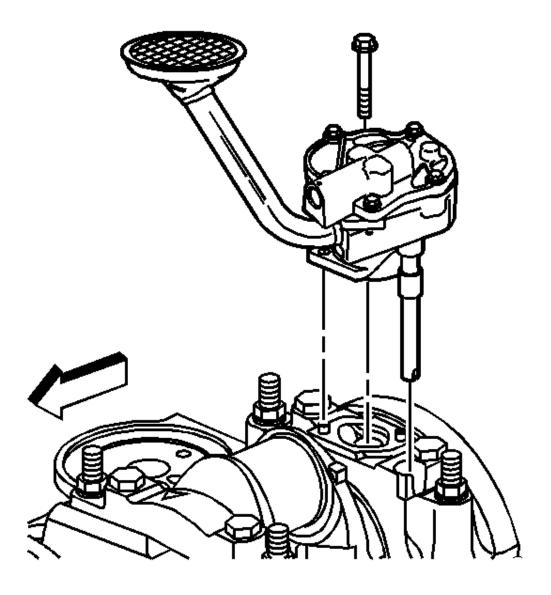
View Of Oil Pump Assembly Courtesy of GENERAL MOTORS CORP.
